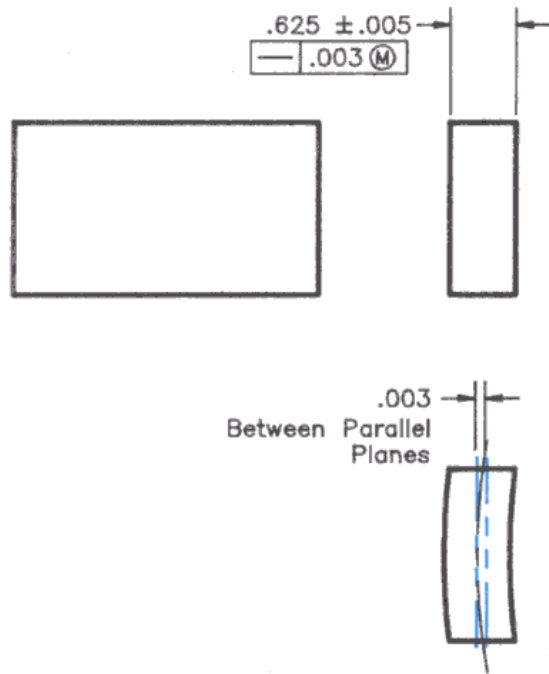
Center plane flatness is tolerated by placing the feature control frame, showing a straightness tolerance, adjacent to the dimension value.
